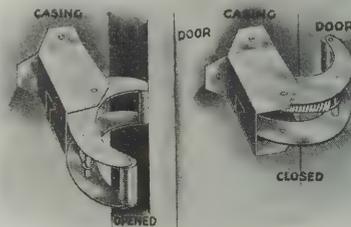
Crescent Door Holders, Showing the Door Open and Closed
